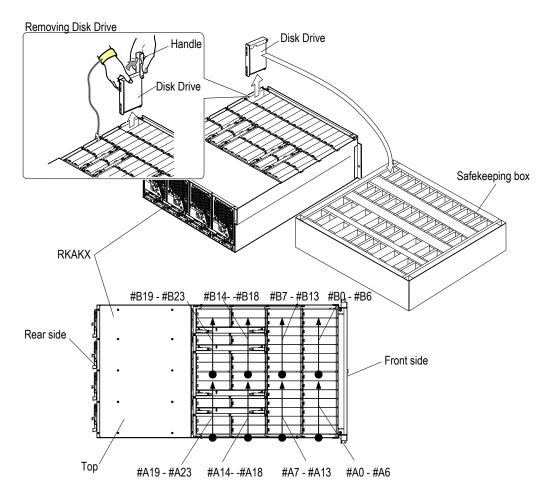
Removing the Disk Drive (RKAKX)
